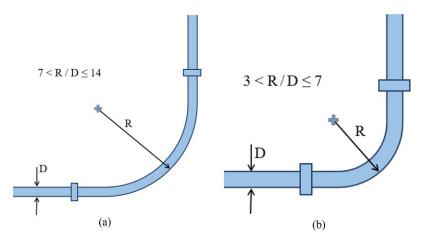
Schematic cross section of long-radius (A) and short-radius (B) bends; D: tube diameter, and R: bend radius.
